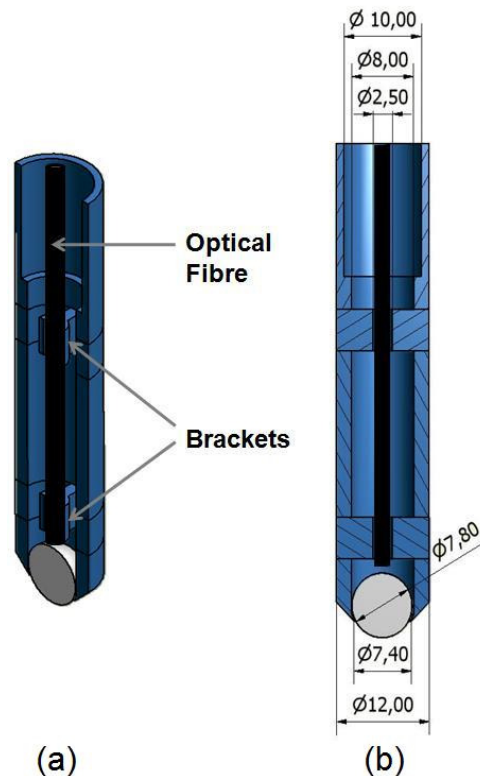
A three dimensional cross-sectional drawing of the proposed air-cushion tactile probe with the supporting brackets is shown in (a). The dimensions of the sensor are illustrated in (b) with all the measurements being in millimeters.
